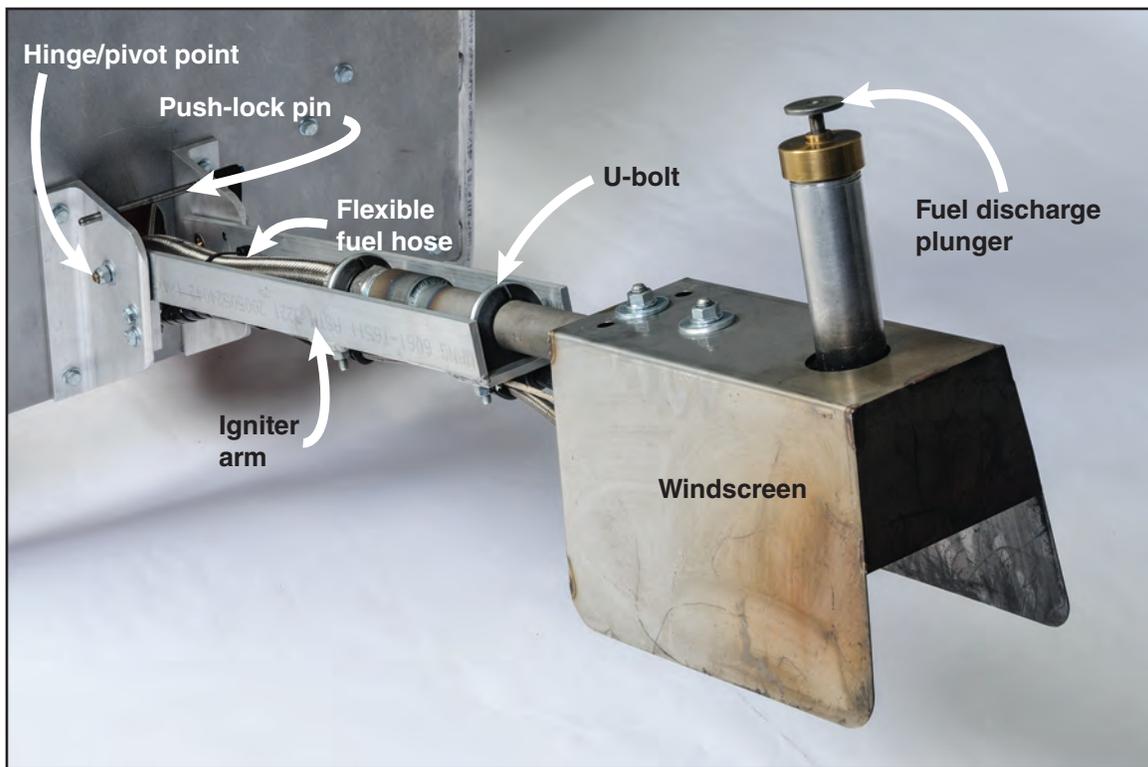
The igniter arm assembled for use and shown in the lowered position.
